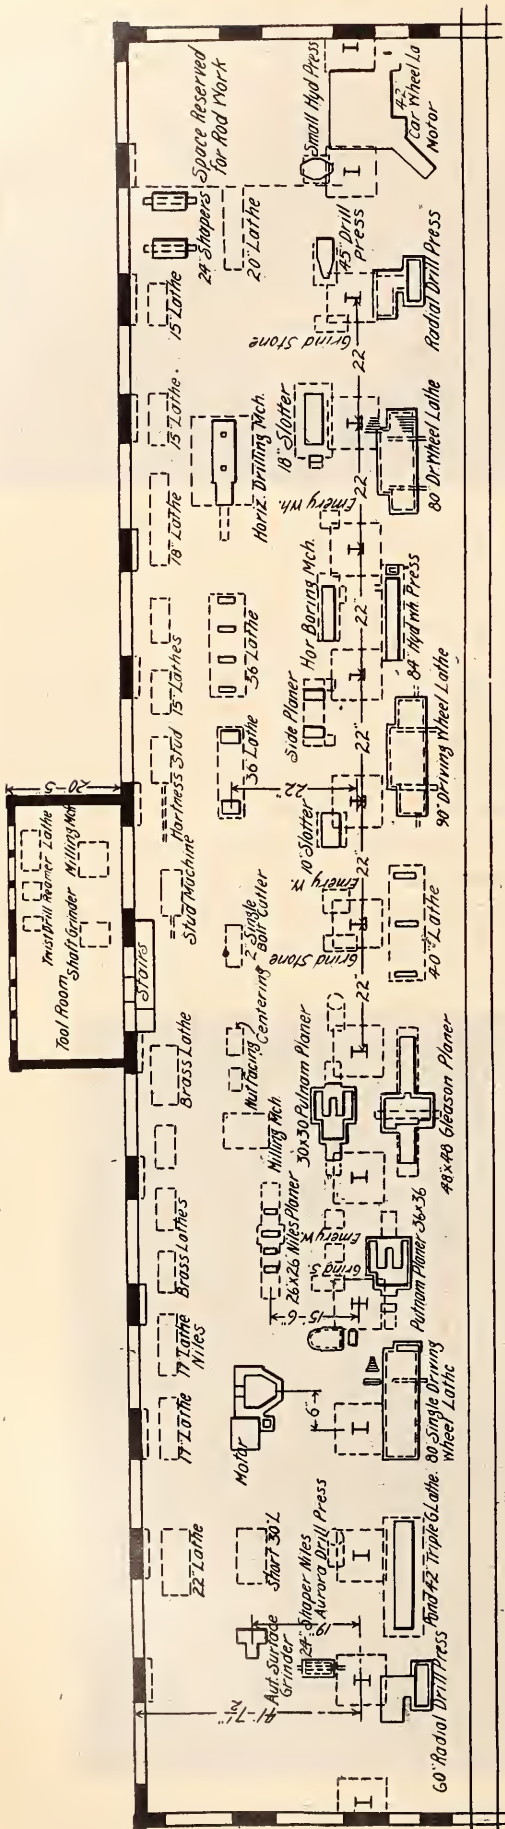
FLOOR PLAN OF MACHINE BAY AND TOOL ROOM—C. & E. I. R. R.
